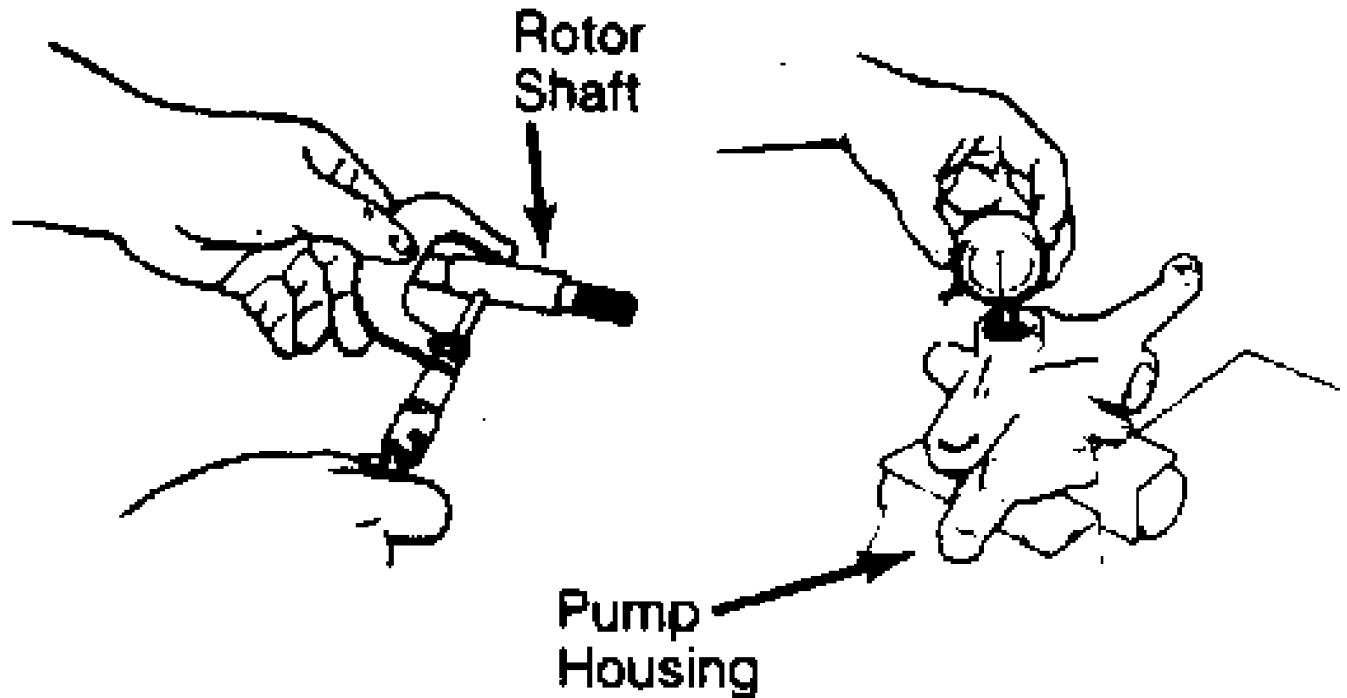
Checking Pump Housing Bushing-to-Rotor Shaft Clearance
